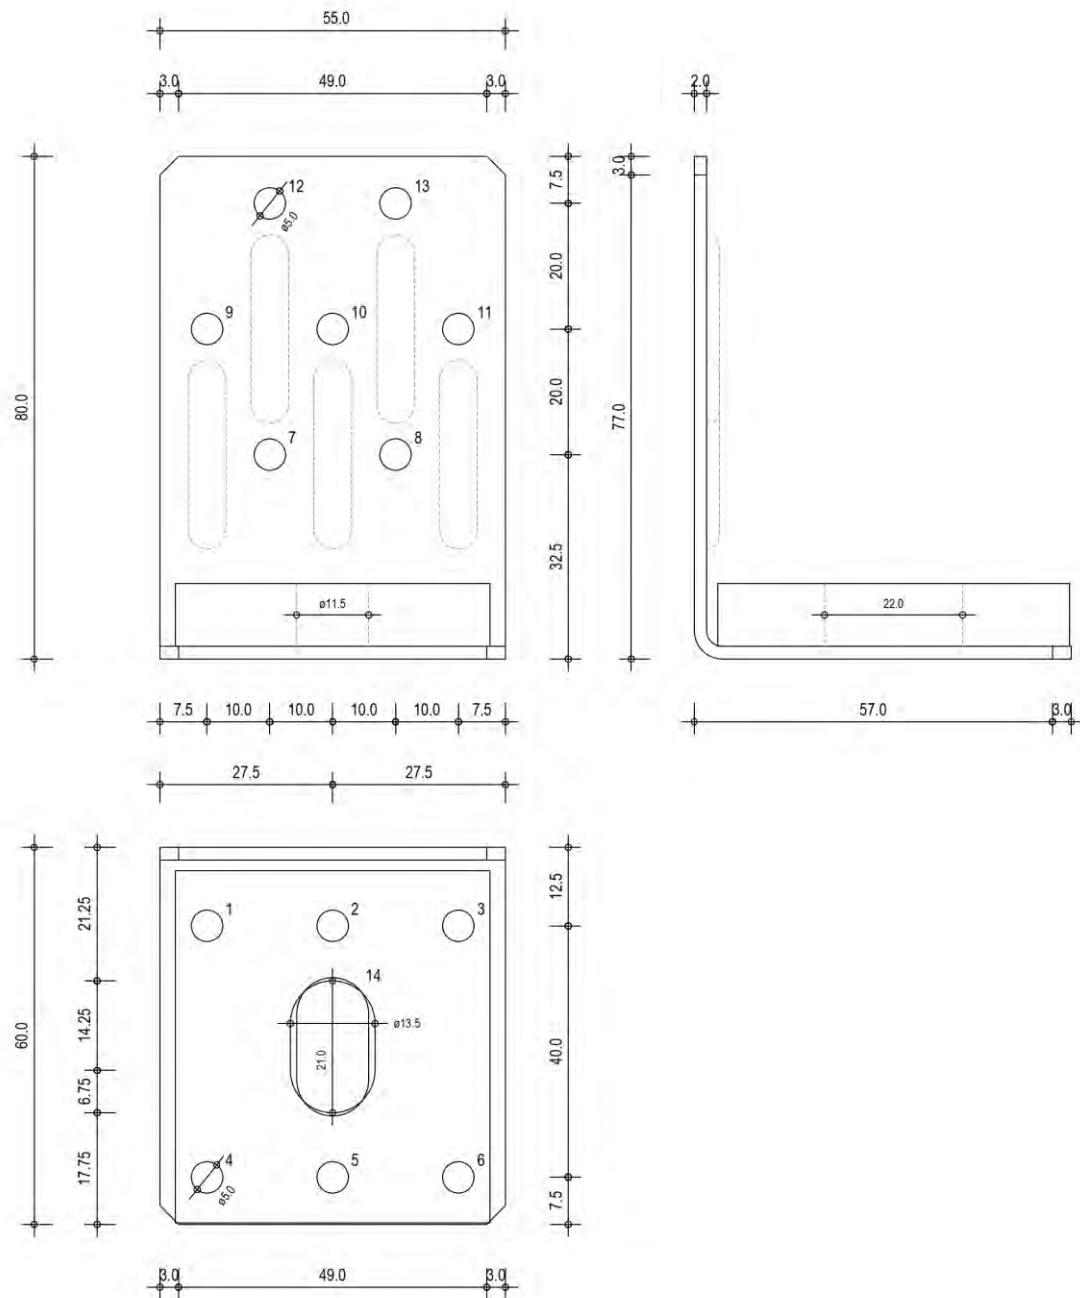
Dimensions of Angle Bracket 110829 and Washer 111307
